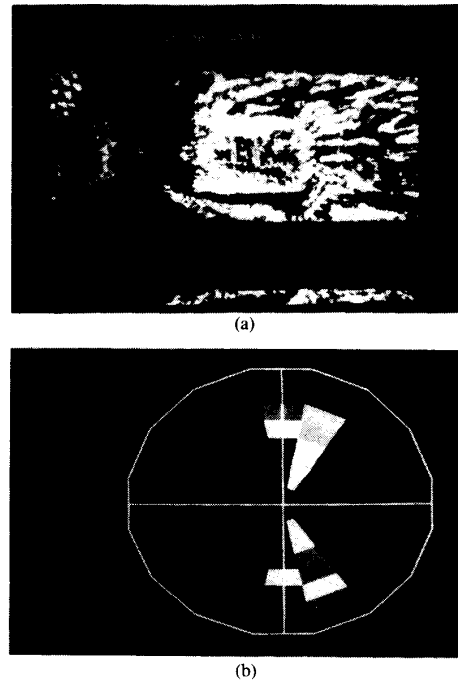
(a) Photograph of the top view of a good solder joint; (b) Gaussian image of the solder joint shown in (a).
